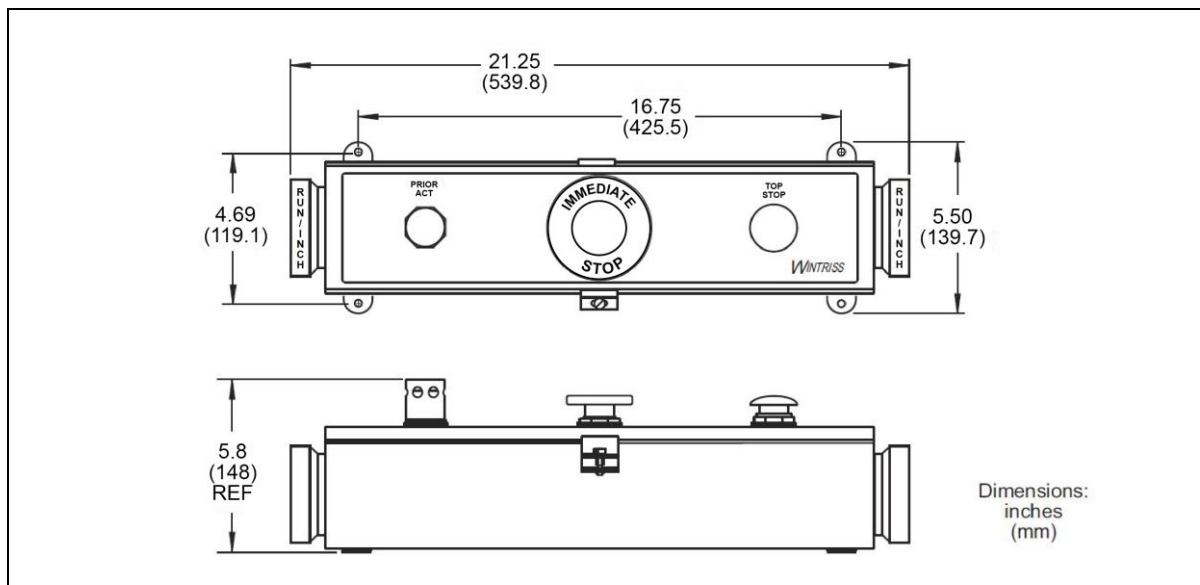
Unwired Operator Station: Mounting Dimensions
